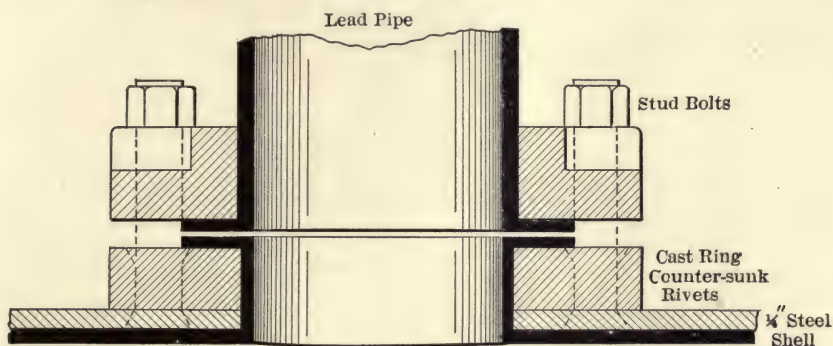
Detail of Montejus lead lined tank construction. Showing solution pipe connection at top.
